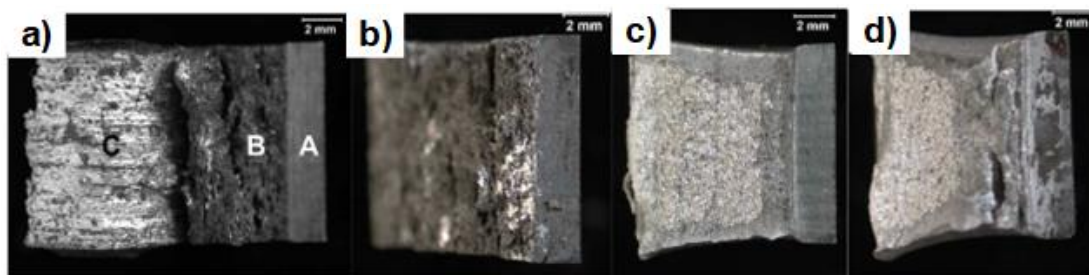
Fracture surfaces of the specimens after the Charpy impact test (+20 °C): (a) puddle iron in post-operated state (A–notch zone, B–crack propagation area, C–the plastic zone from the bottom part of the Charpy specimen), (b) puddle iron after heat treatment (normalized), (c) early 20th-century mild steel, post-operated state, (d) early 20th century mild steel, normalized state.
